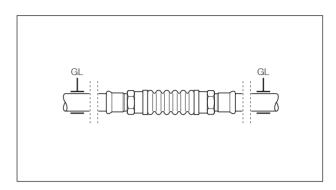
Commercially available axial compensator with female thread and Geberit Mapress adaptor with male thread
